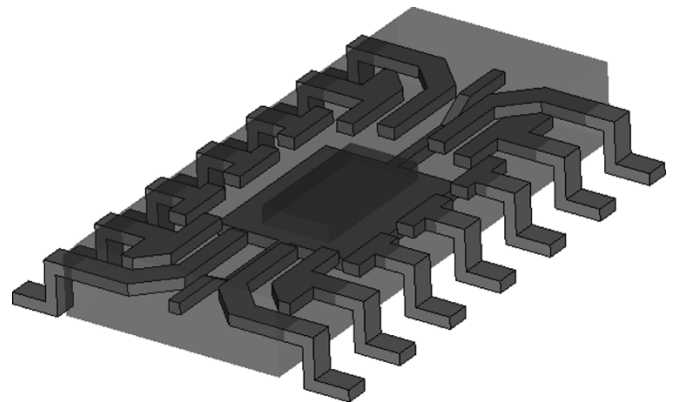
Surface mount package structure with 14 pins (28 ports). Bonding wires and printed circuit board on which package is mounted are not shown.
